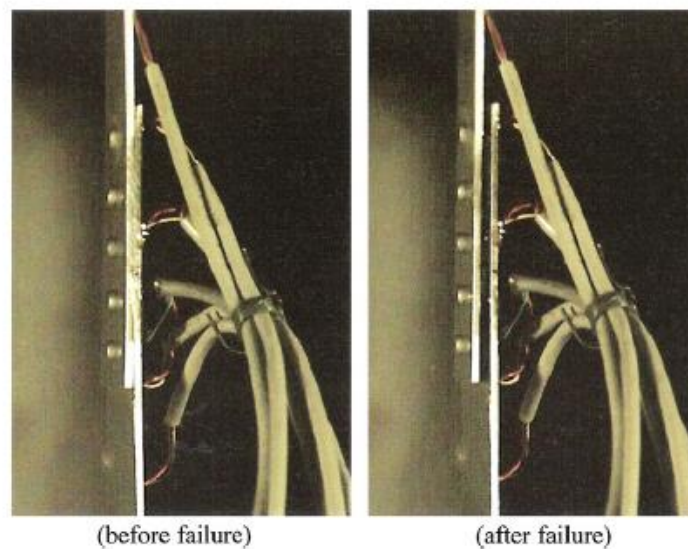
Lap joint with five rivets before and after failure (Pavan et al. 2011)
